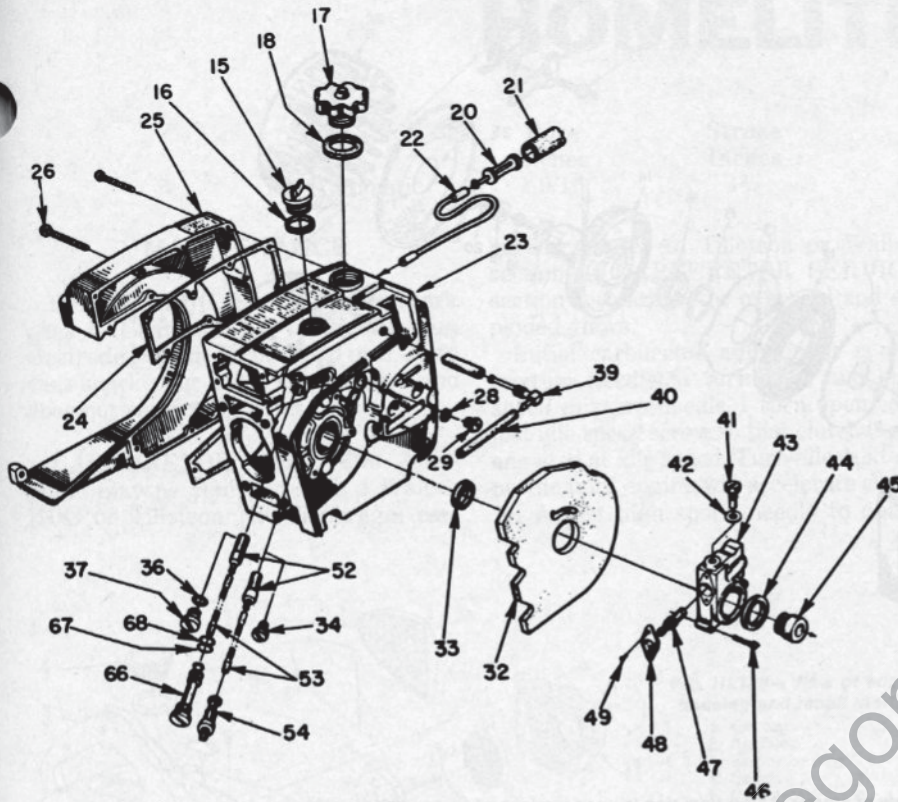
Exploded view showing automatic chain oiler pump, manual and automatic oil pick-ups, crankcase and oil reservoir and fuel tank. Automatic oil pump plunger (47) and pump body (43) are available as a matched set only. Plug (34) is used to seal opening when saw is not equipped with manual chain oiler; plug (37) and washer (36) are used on models not equipped with automatic chain oiler.
